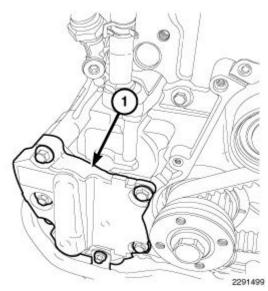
Oil Pressure Relief Valve Cover Bolts Courtesy of CHRYSLER LLC
